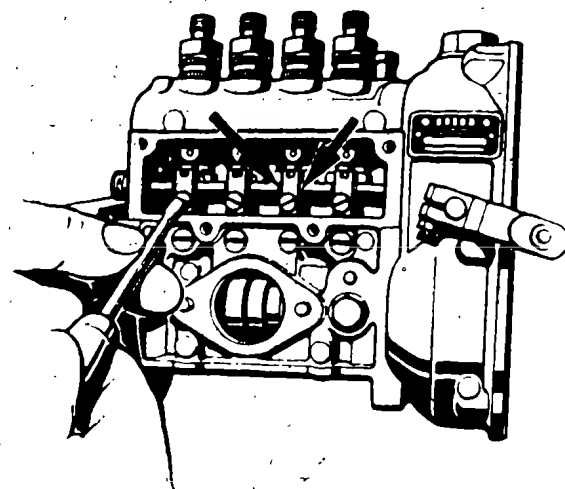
Tighten clamping pieces on control rod in such a way that they lie exactly between the two marks.
